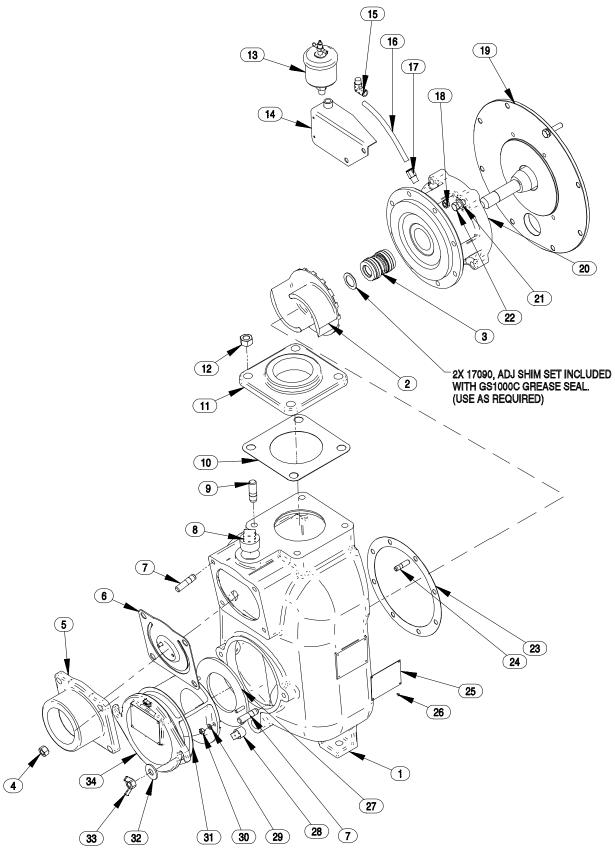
Pump End Assembly 13E2-(12LD477 S/G)
